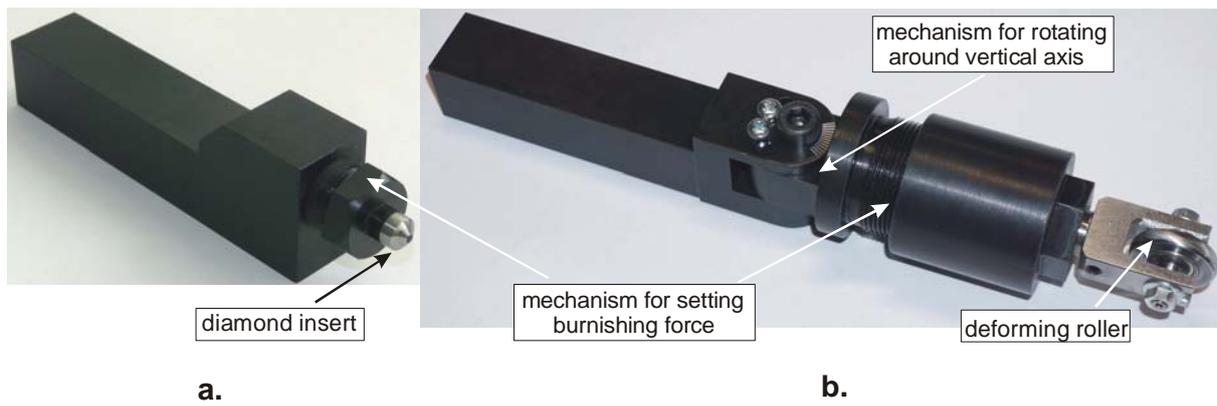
Burnishing devices: a. diamond burnishing; b. single-roller burnishing
